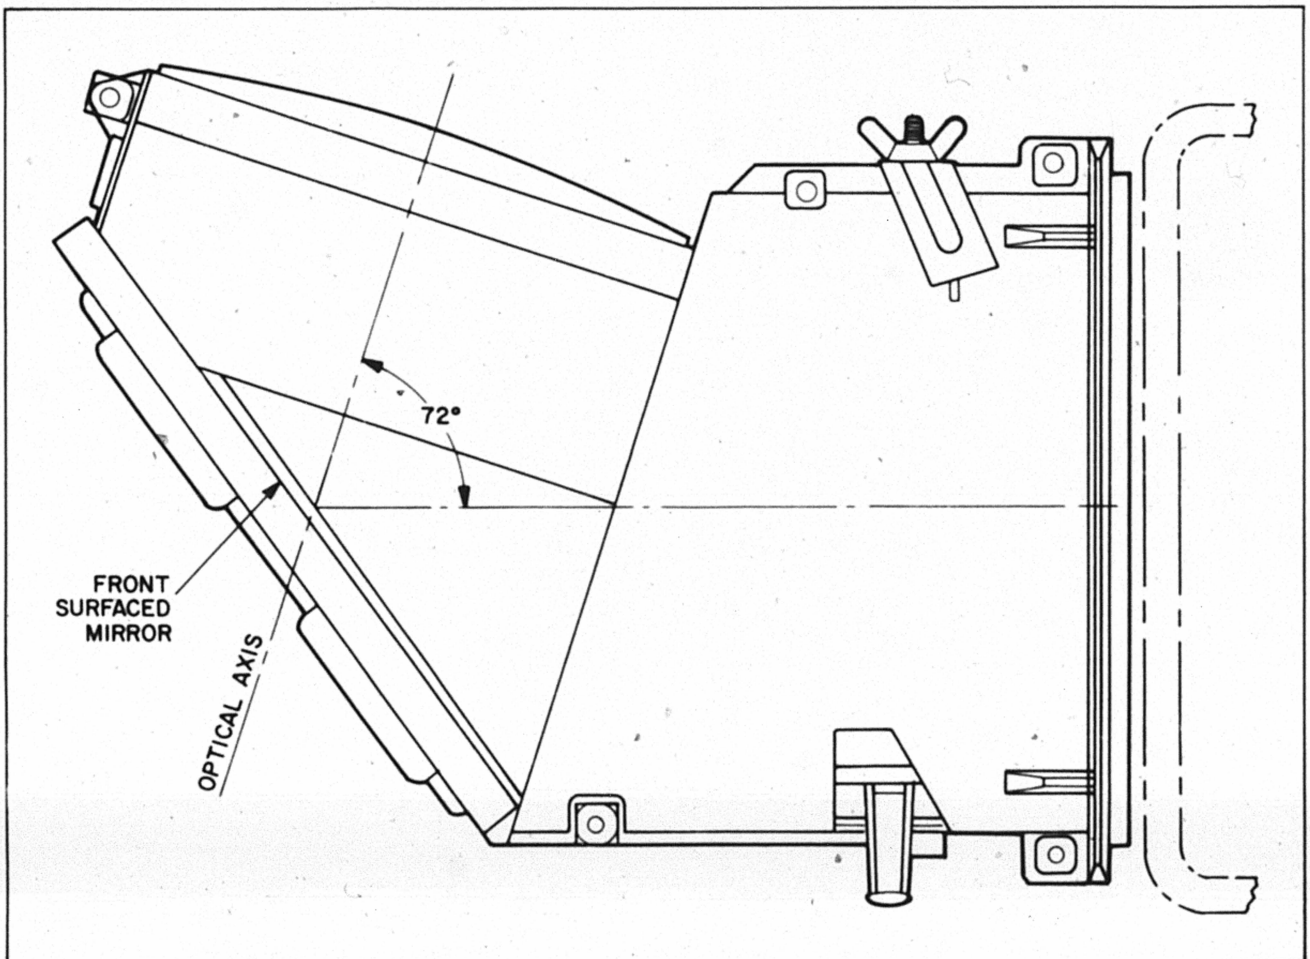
PROFILE DELTA 7 ASSEMBLY
